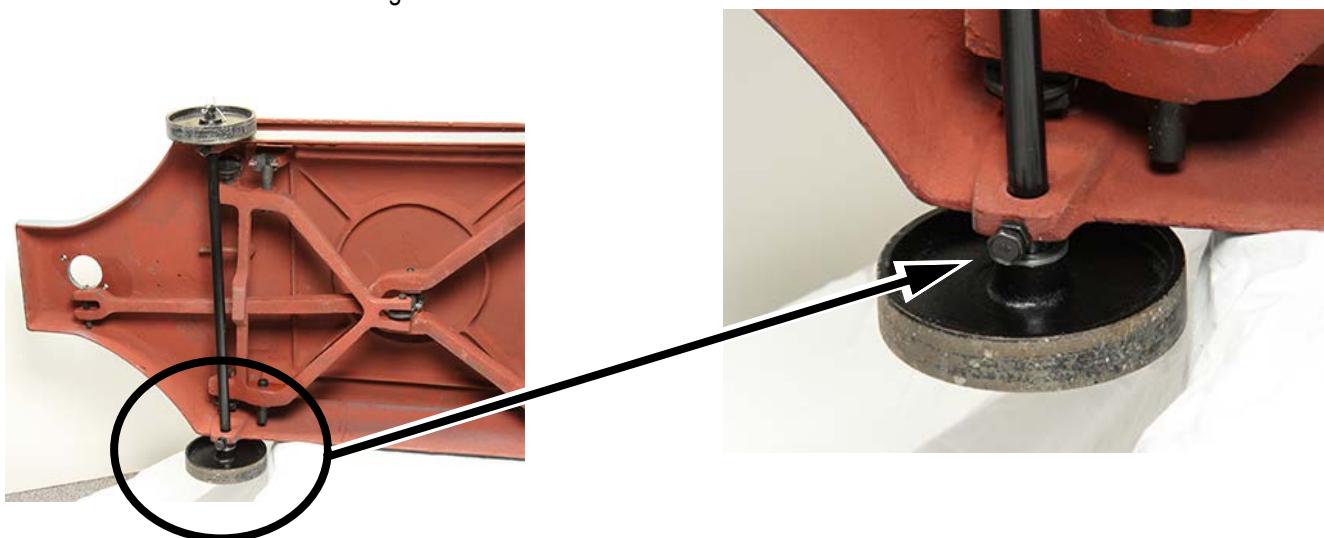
Secure Wheel Axle to Frame Using Axle Locking Bolts on Each Wheel
